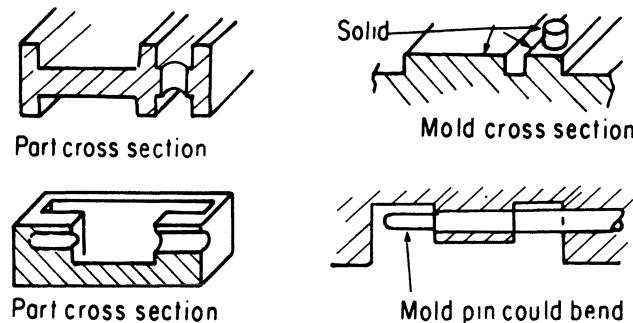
When holes are too near an edge or corner, material may not “weld” properly around mold pins. Also, the flow of the melt can bend mold pins for blind holes when their length exceeds a diameter of $2\frac{1}{2}$ times and when holes are to be long with small diameters, even if these are anchored at both ends.
